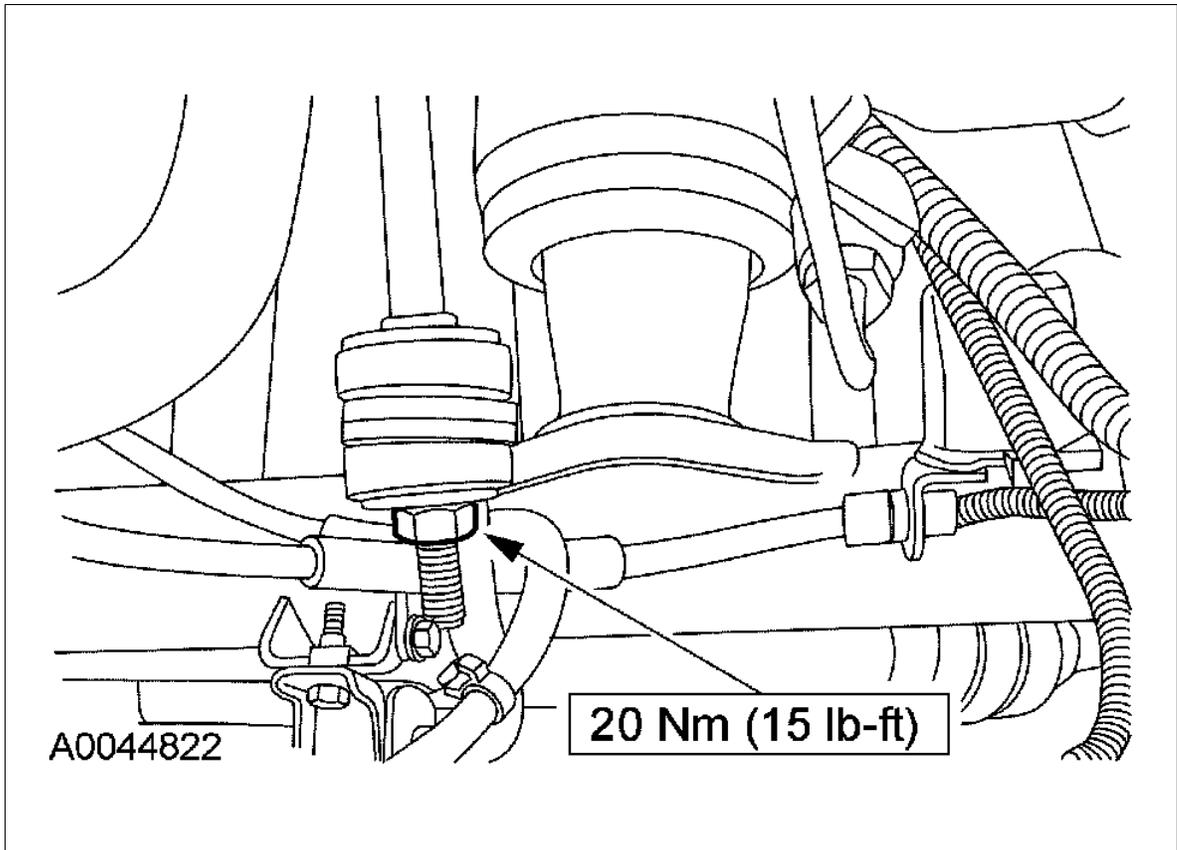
Installing Rear Stabilizer Bar Retainer Bolts
